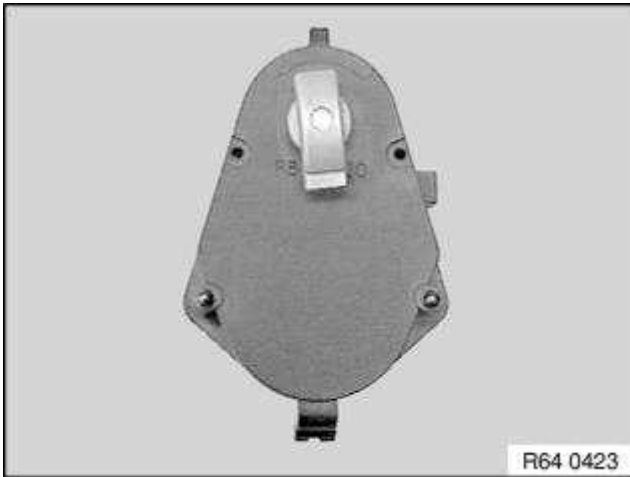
Align Shaft For Defrosting Flaps And Drive
